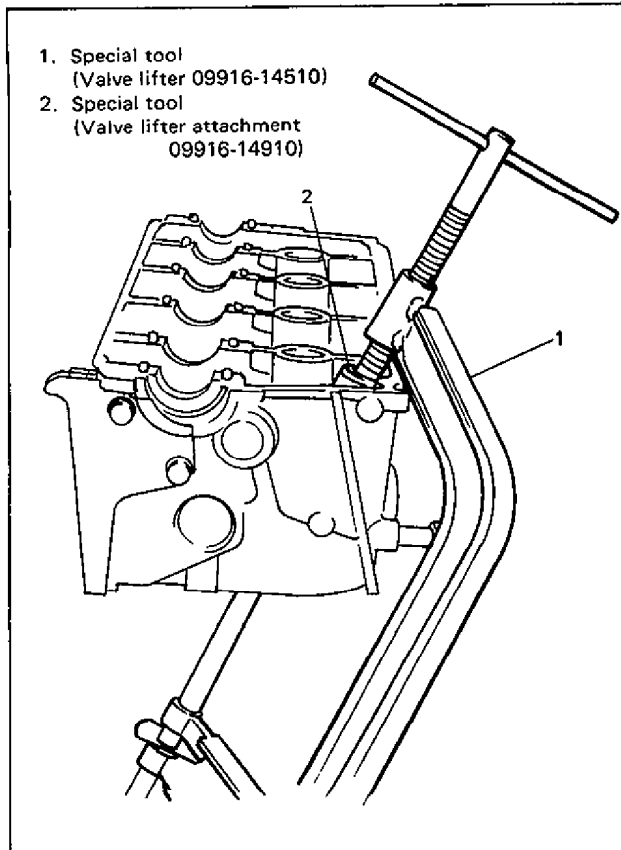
A-79 Special Tool (Valve Lifter) Installation
